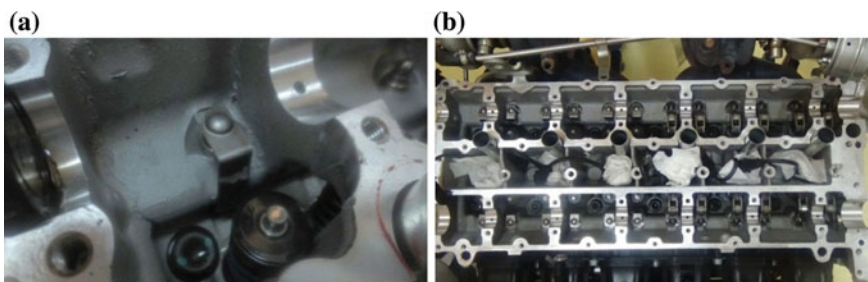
Schematic of valve system in CDA engine. a Metal clip; b cylinder head after adjustment
